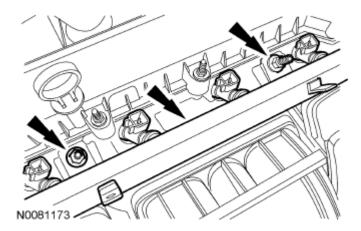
Locating Stud Bolts, Fuel Rail And Fuel Injectors Courtesy of FORD MOTOR CO.
